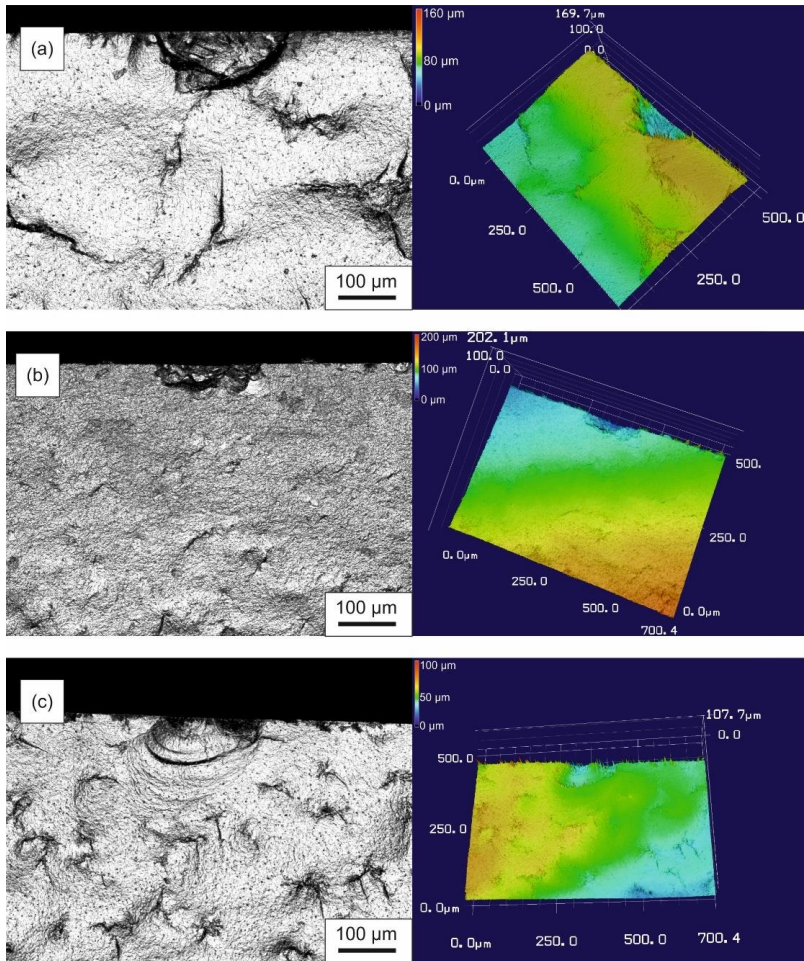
Laser microscopy images of the flaws that may have originated the fracture in selected (a) STF25 (fracture stress 37 MPa), (b) STF35 (83 MPa), and (c) STF50 (44 MPa) samples.
